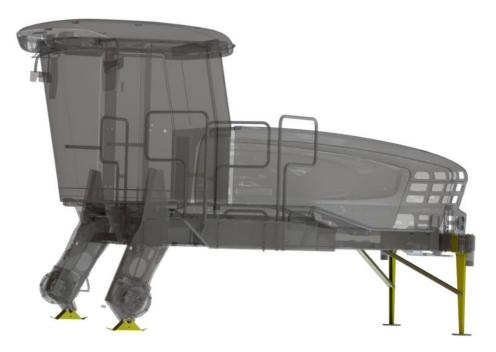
Final stand assembly (yellow components) shown mounted to a tractor.
